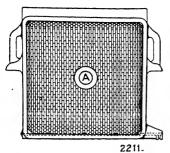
Recessed Filter Plate showing centre feed A and outlet hole on left.
